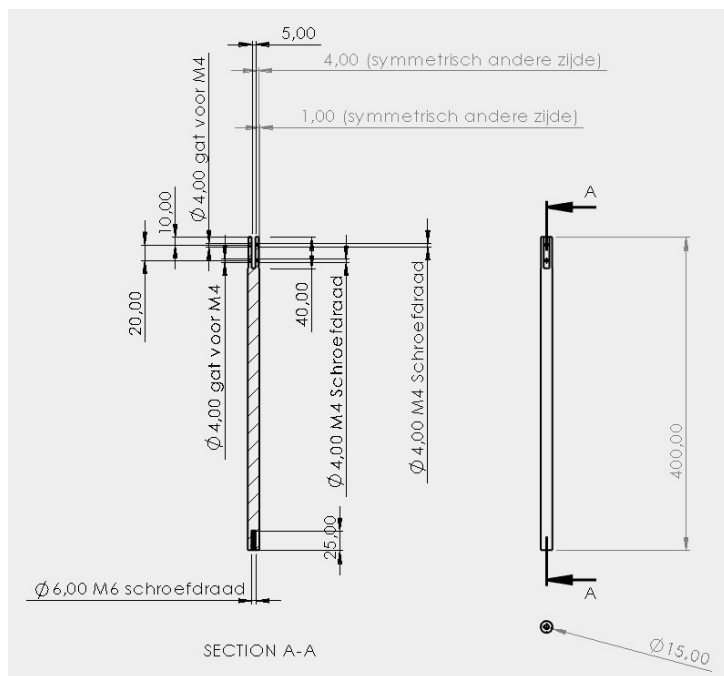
Dimensions of the Shaft that connects the Wing to the Robot Flange. All units in mm. (Drawing by Dirk De Boer)
